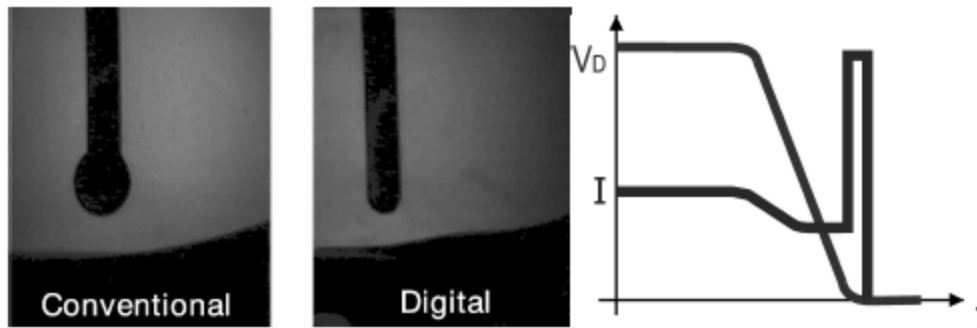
Digitally controlled end-of-welding  $V_d$  ... Wirefeed speed in  $m/min$   $I$  ... Welding current in amperes
